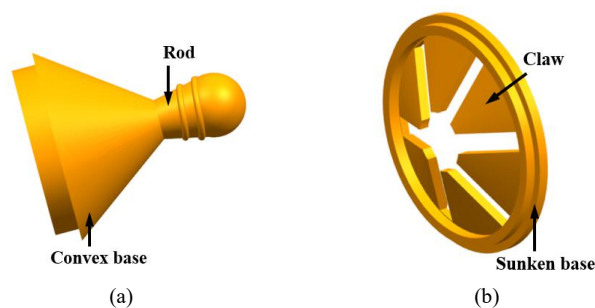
Assembly mechanism [28]. (a) Rod mechanism. (b) Claw mechanism.
